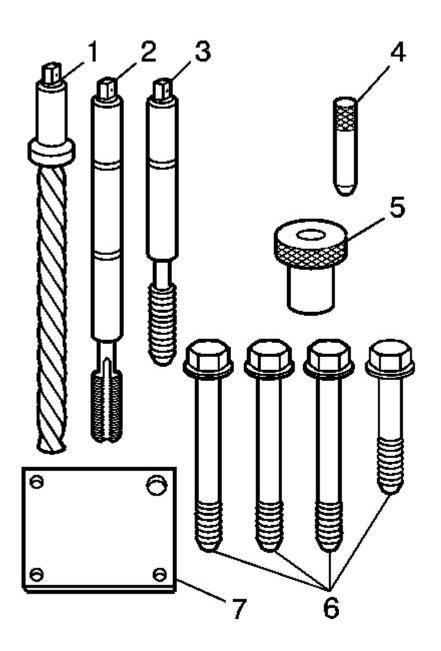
View Of Cylinder Head Bolt Hole Required Tools Courtesy of GENERAL MOTORS CORP.
